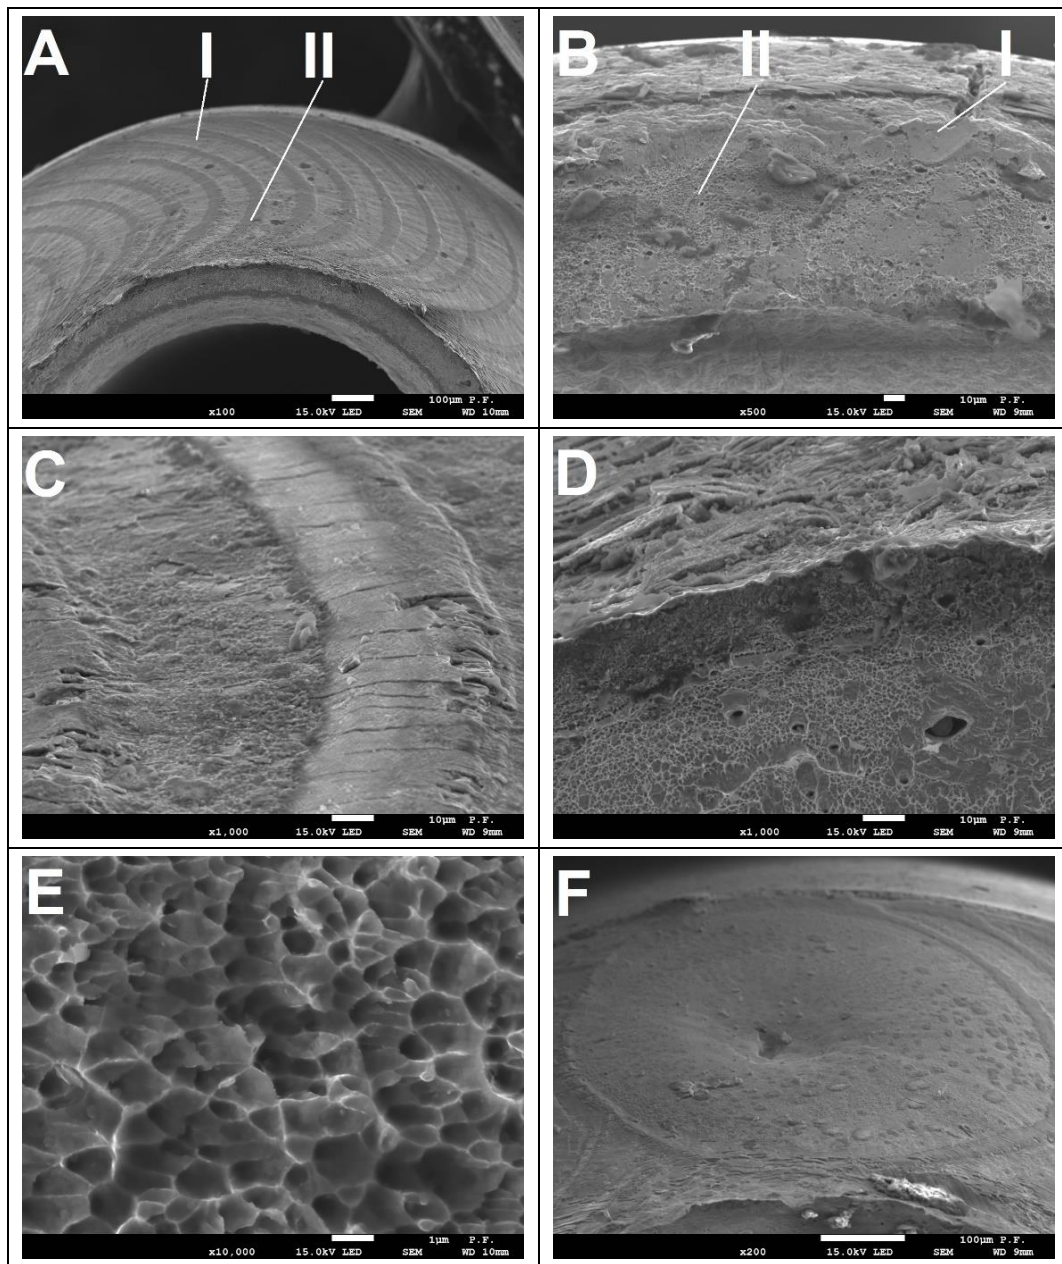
Morphology of the sample fracture after breaking: (A) 500× magnification; (B) 100× magnification; (C) 1000× magnification; (D) 500× magnification; (E) 10,000× magnification; (F) 200× magnification.
